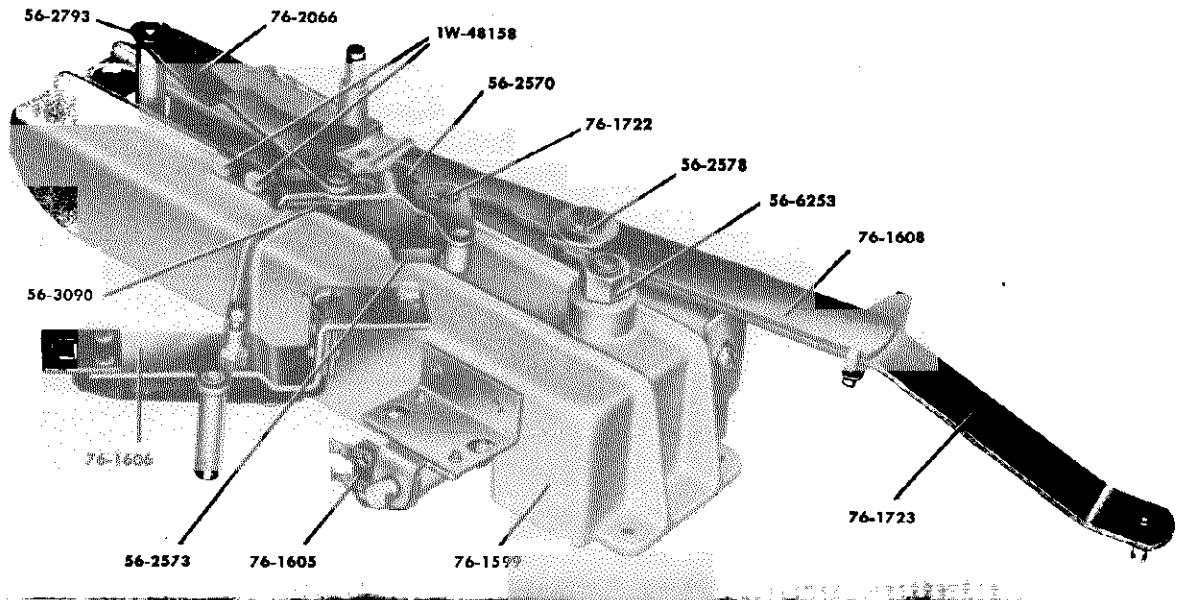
CHANGER MECHANISM ASSEMBLY, UNDERSIDE VIEW.
